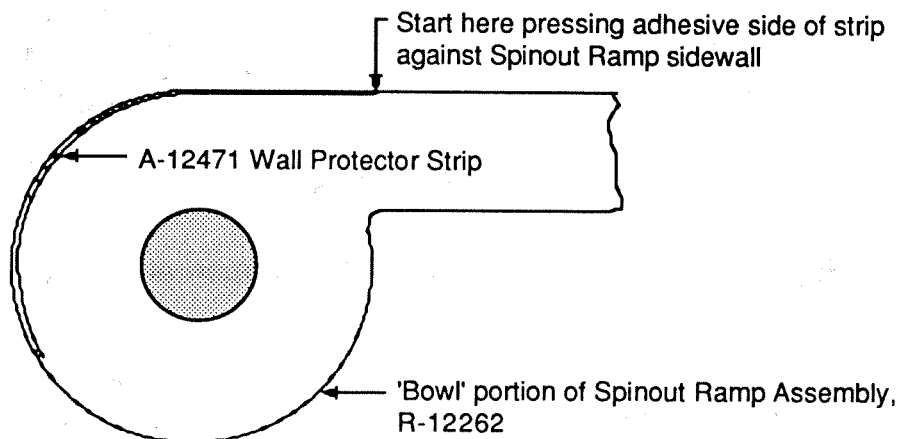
Installation of Spinout Ramp Wall Protector Strip
